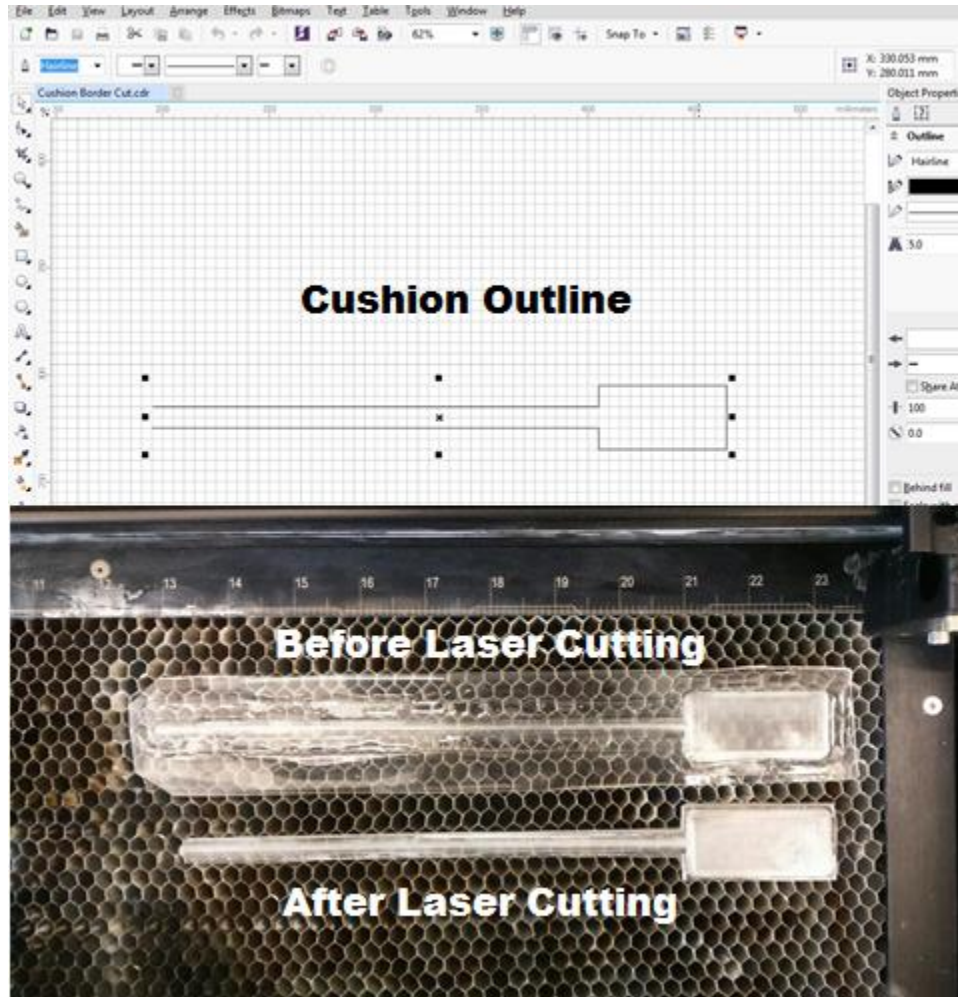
CorelDraw outline of the cushion, with before and after laser cutting.
